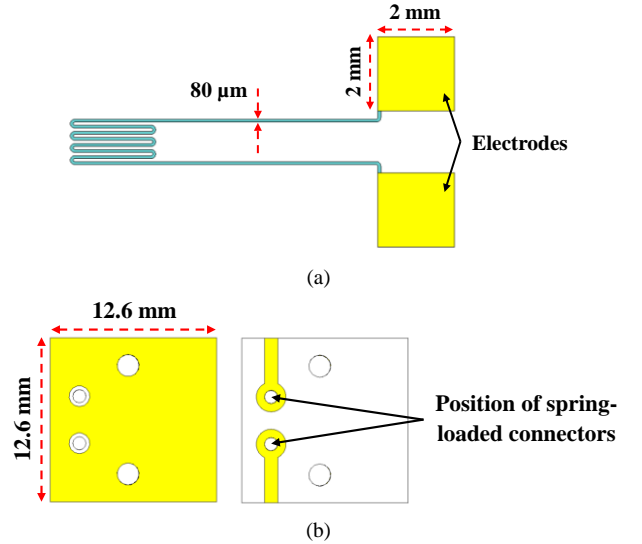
(a) Structure of the platinum thin film layer. (b) Layout of the PCB which holds both spring-loaded connectors on their position.
